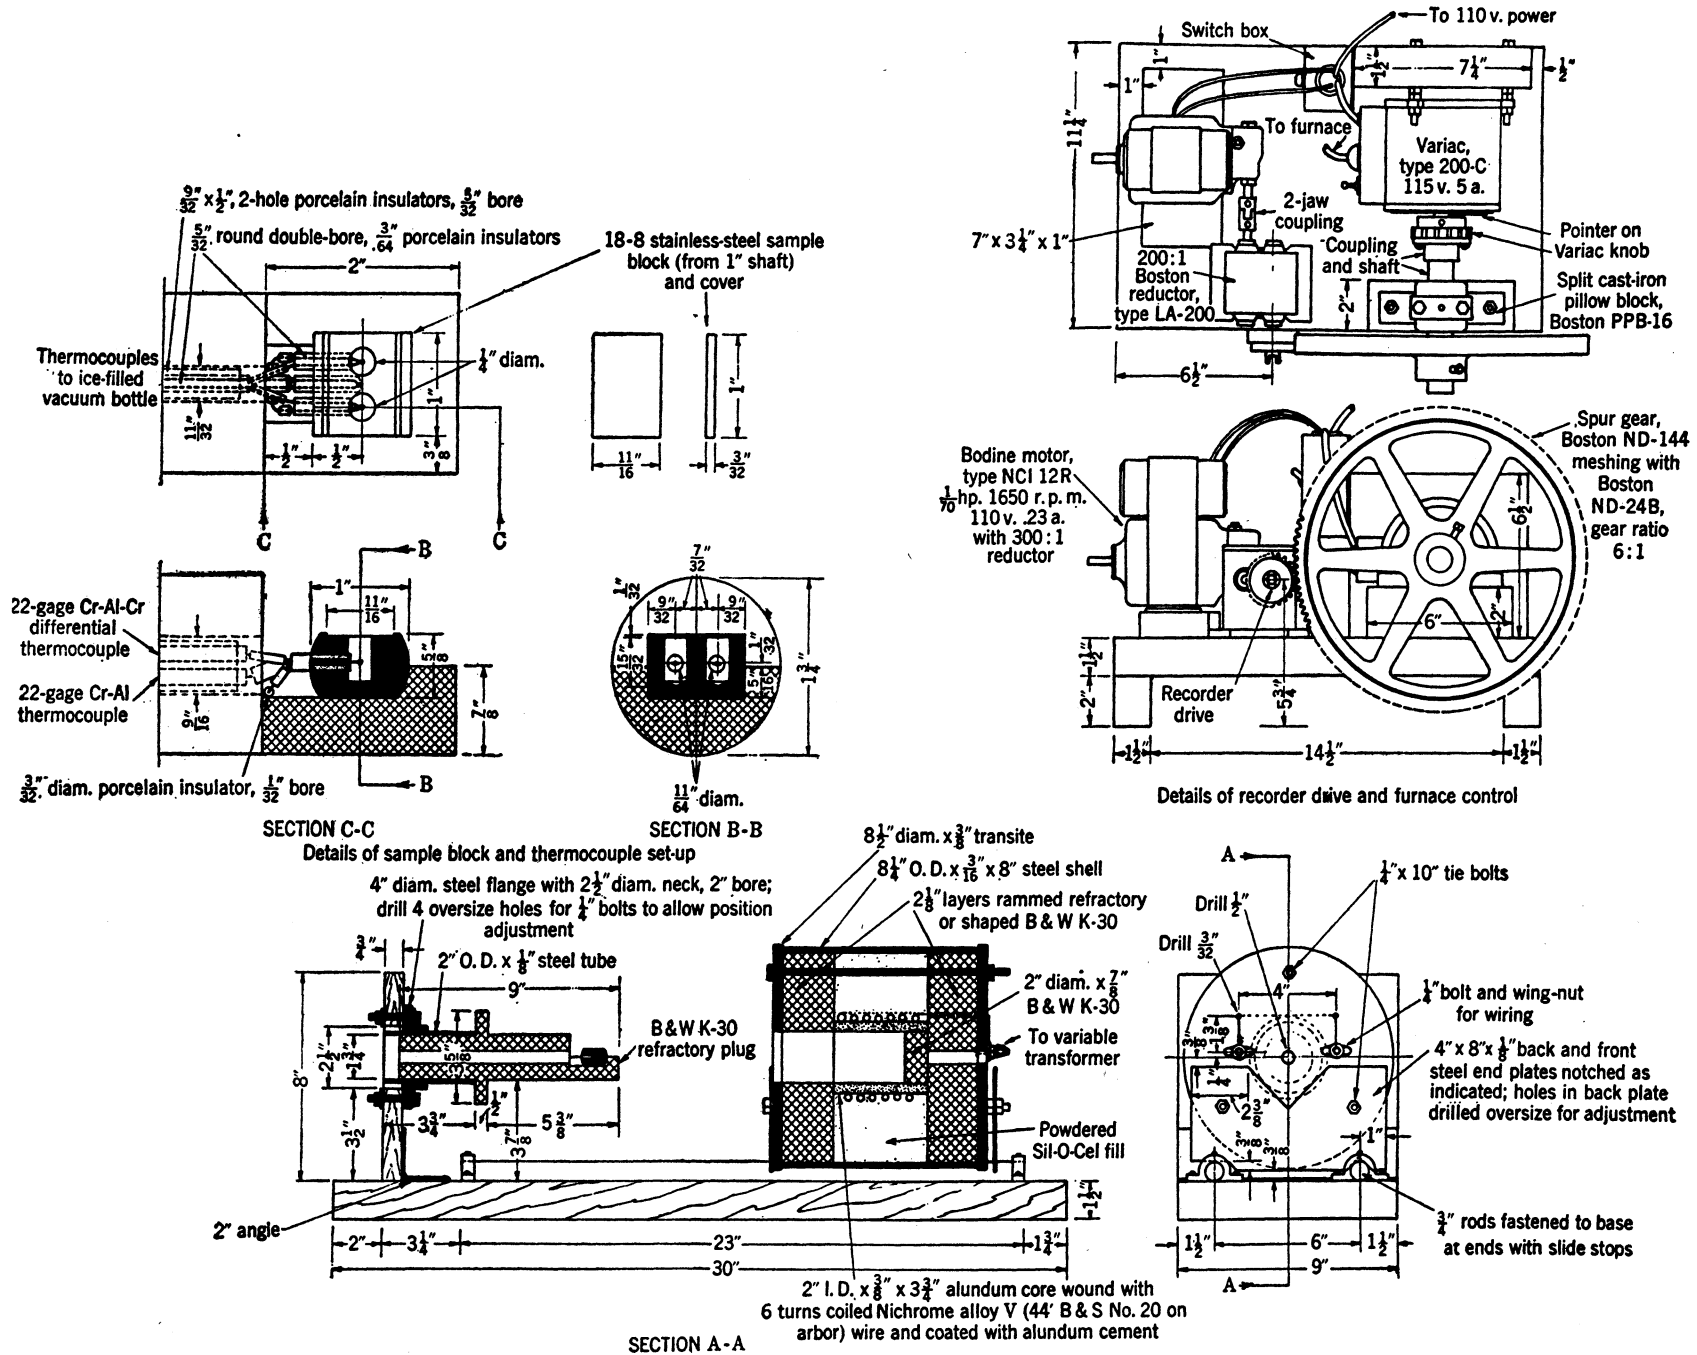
Construction details of furnace, sample block with holder, recorder drive, and furnace control.
